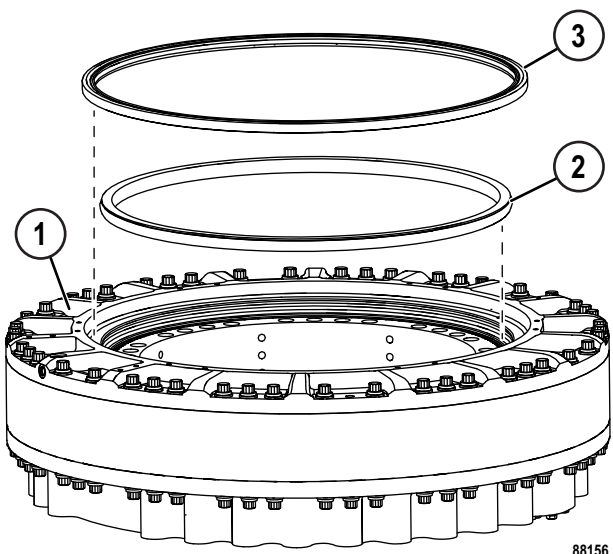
BRAKE SEAL INSTALLATION
